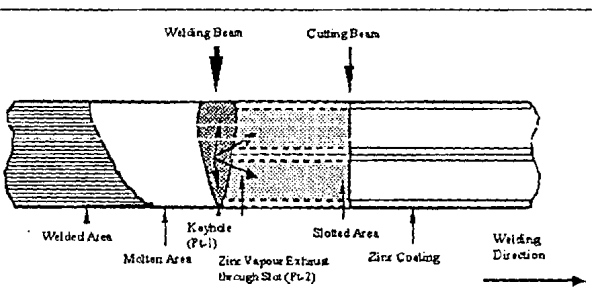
Side view of the welding operation with the two beams in tandem.
